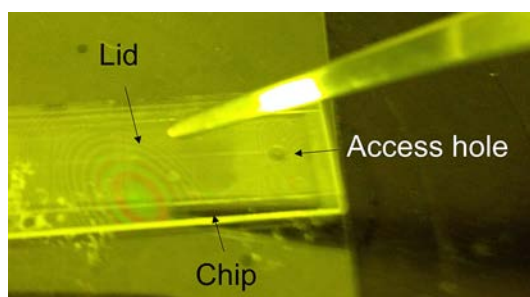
Adhesive bonding of SU-8 coated lid onto chip. The chip is on a hotplate with tweezers applying pressure to bring the lid into full contact.
